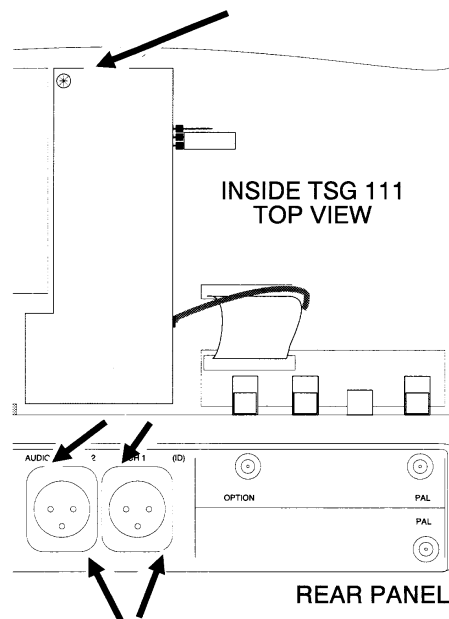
Remove these 5 Pozidriv screws to remove the Audio board from the instrument
